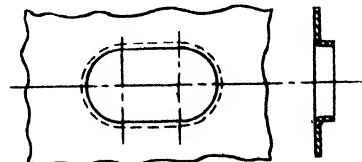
Extruded hole for clearance or lightening in which the flange adds stiffness.
